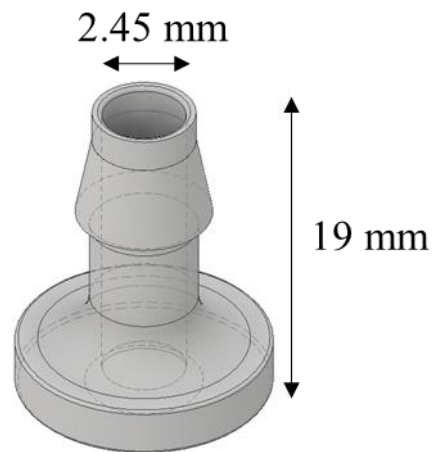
Custom 3D printed barb used to secure the $\frac{3}{4}$ " surethane tubing in the 12-way fiber bundle breakout clamp and 32 channel v-groove clamp.
